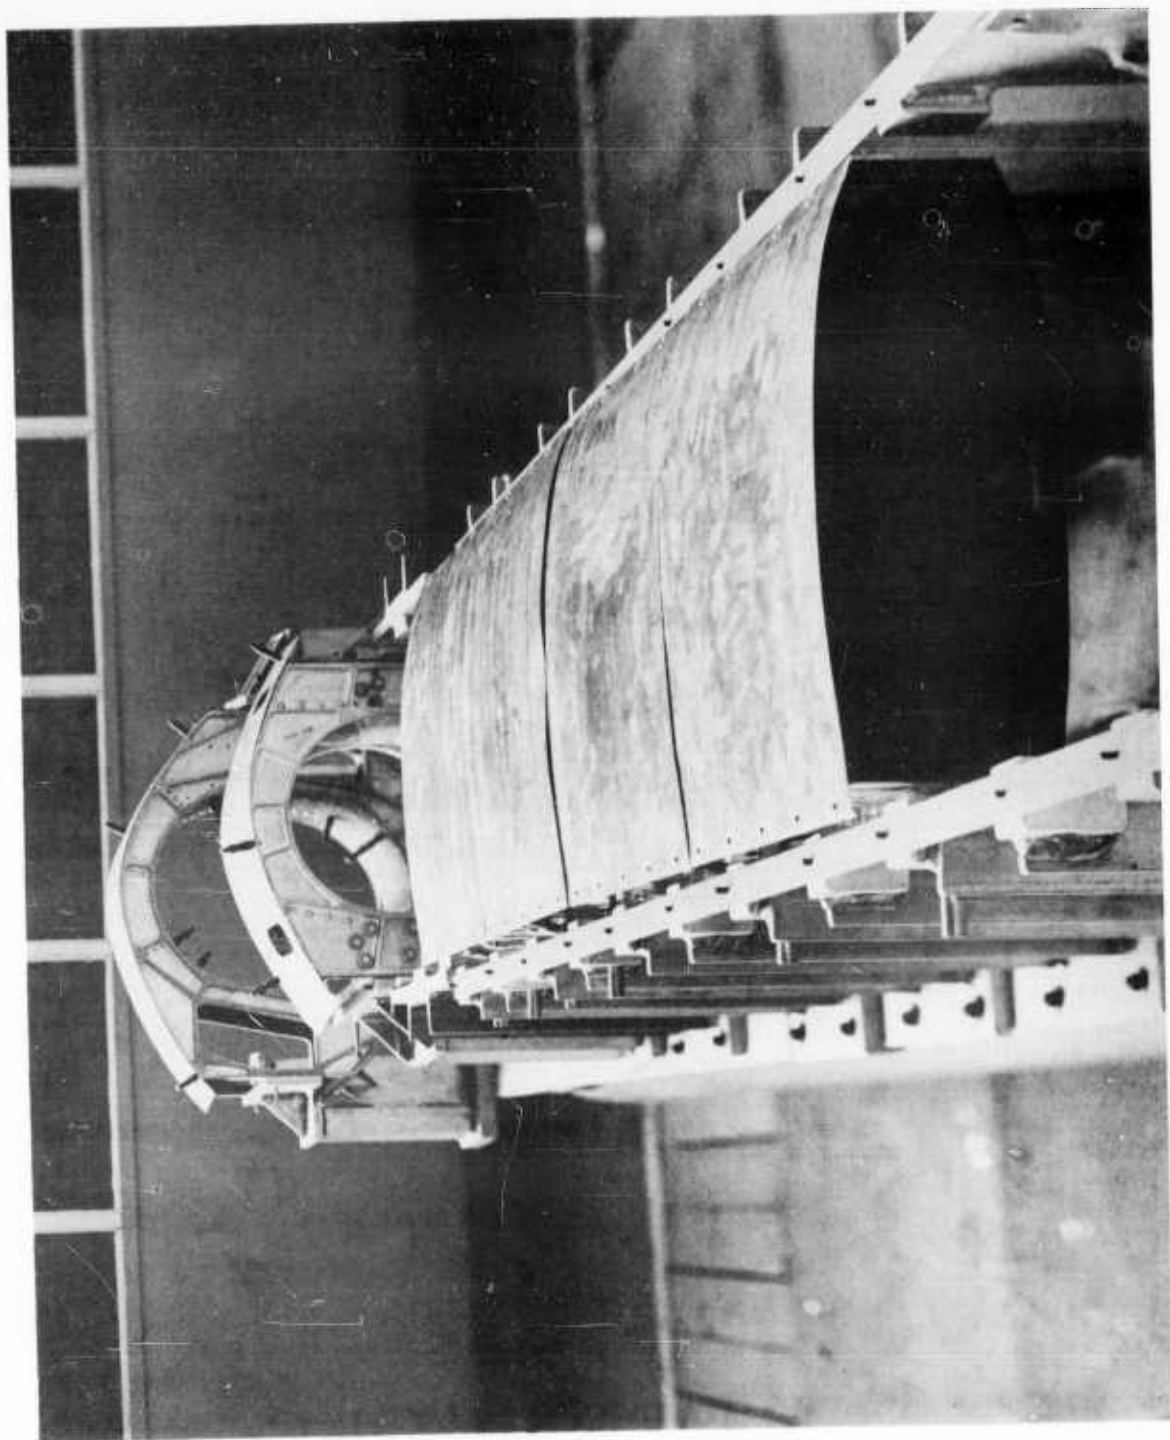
Initiation of Blade Assembly (seen from tip end)
